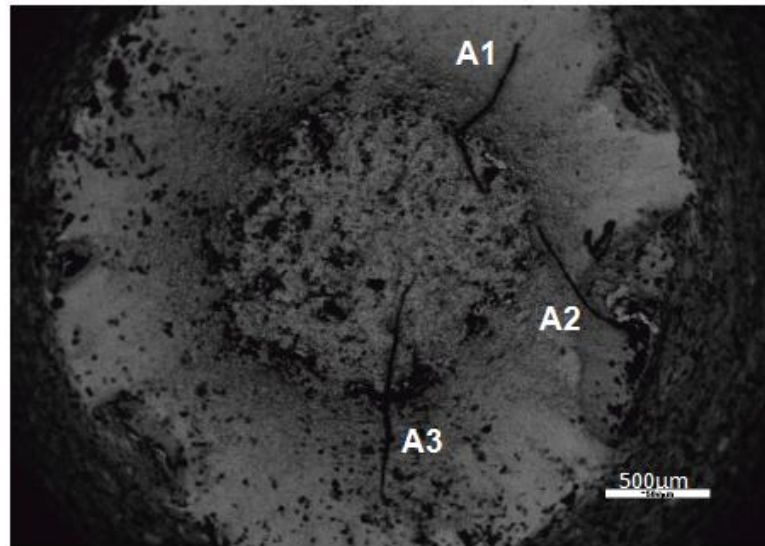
Fracture surface from “as received” material after tensile test.
